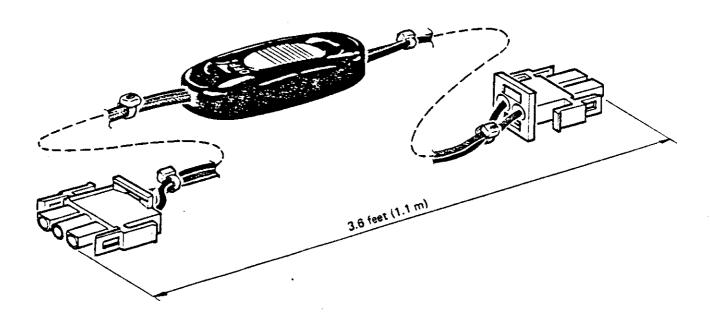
(2).T Printed Circuit Board Removing Cable-M (PCRC-M)
